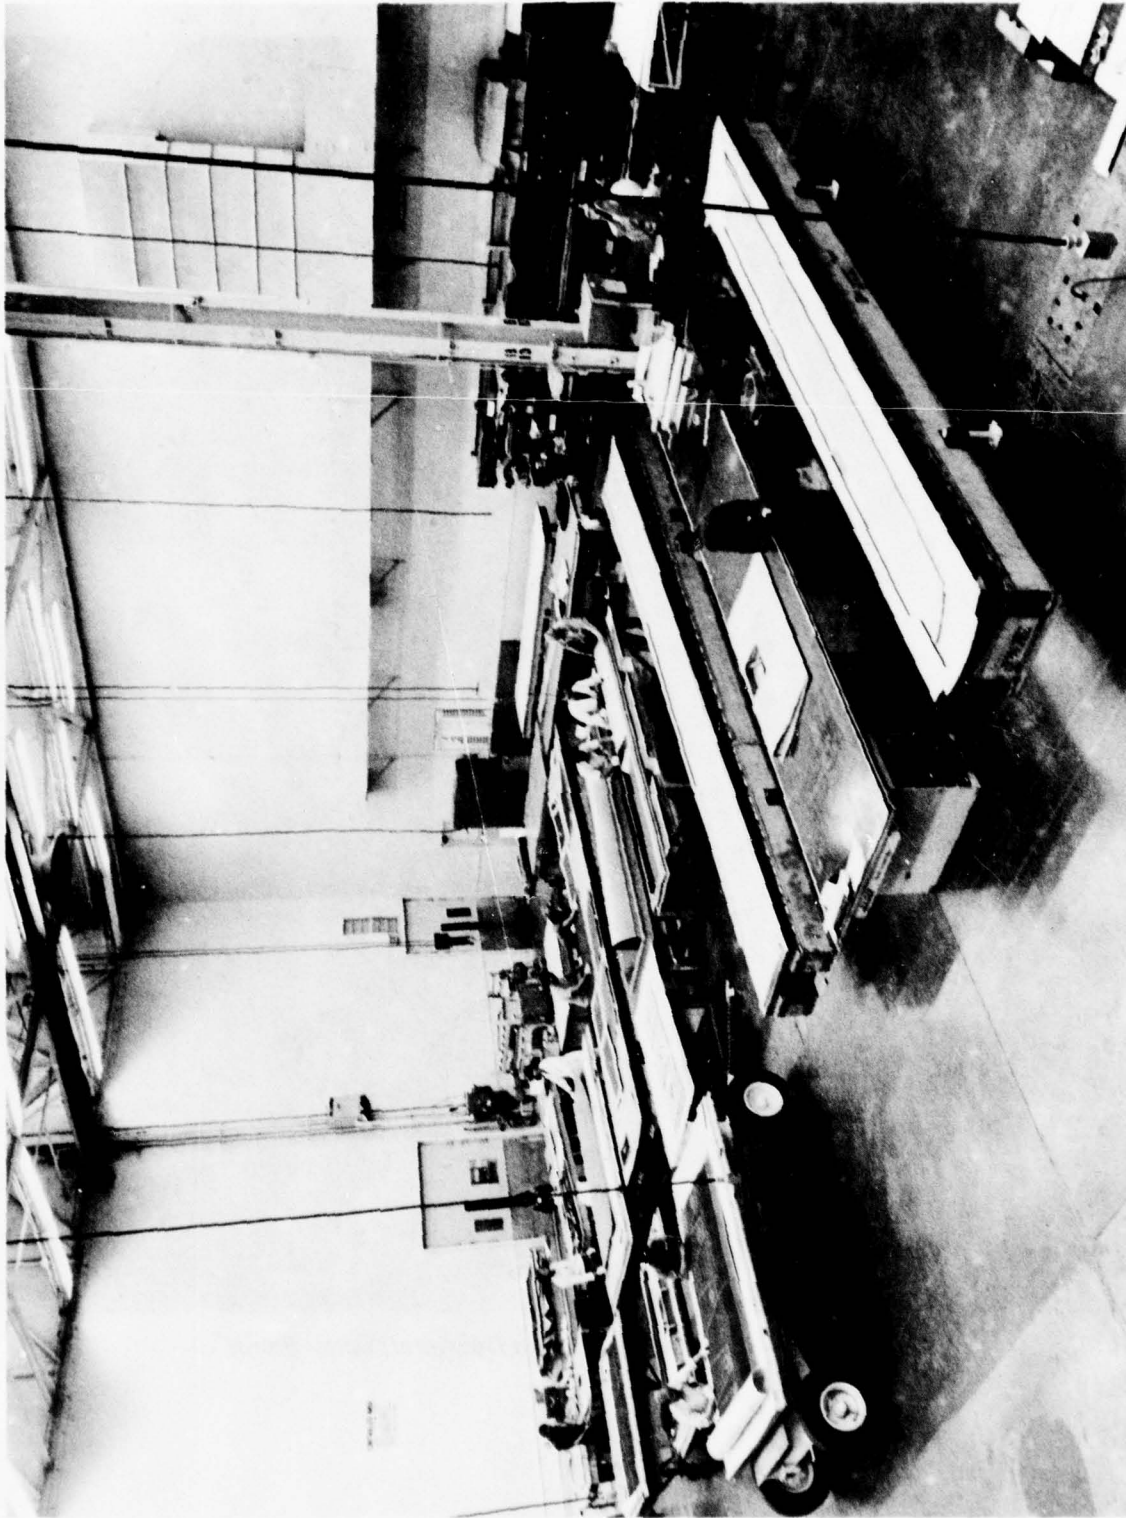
Environmentally Controlled Adhesive Lay-Up Area
